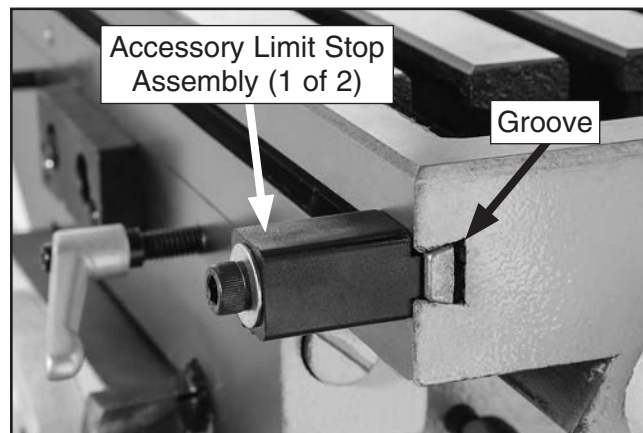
Accessory limit stop assembly mounted in table groove (1 of 2 shown).
